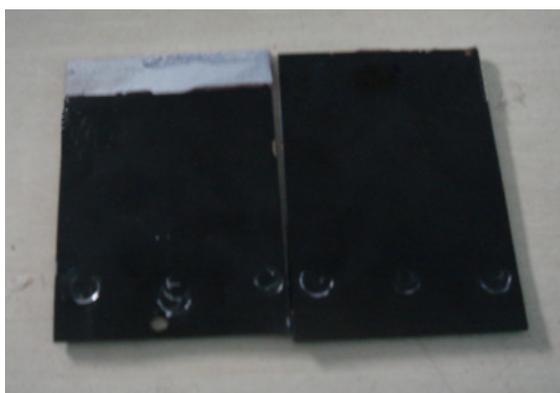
The fracture surfaces of the specimens with the structural adhesive-bonded joints.
